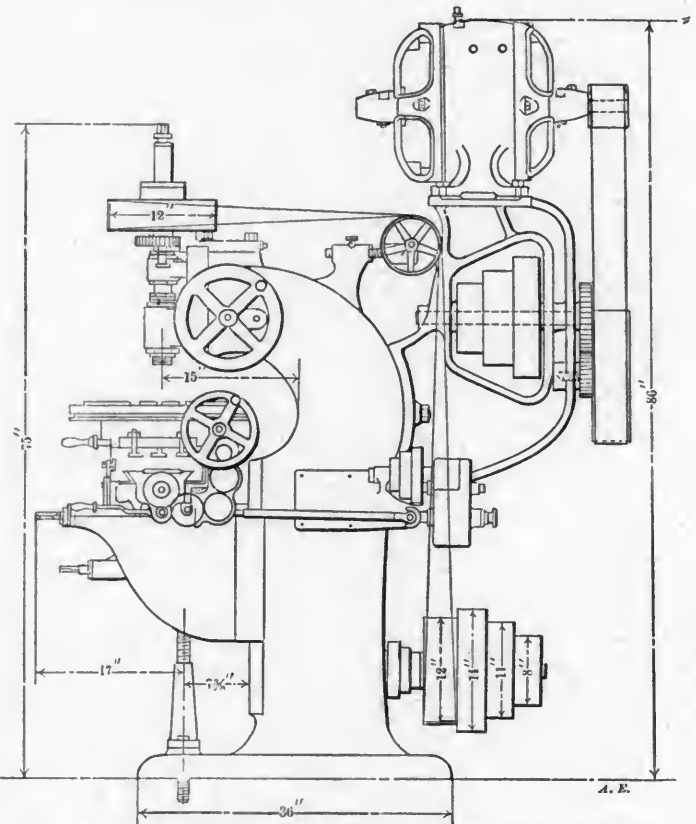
BACK BRACKET DRIVE FOR A VERTICAL MILLING MACHINE.
